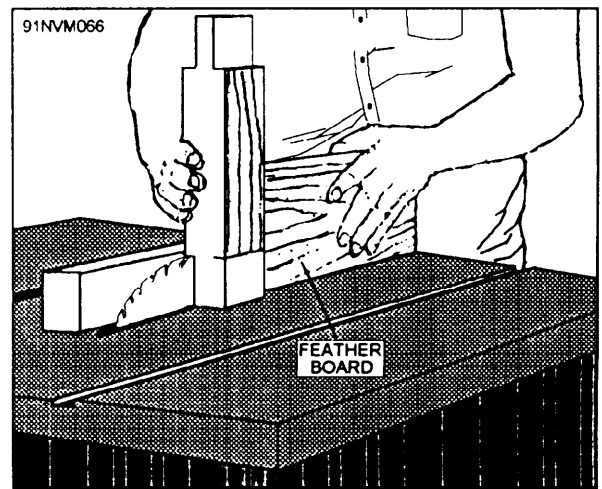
Using a feather board and push board to steady stock when cutting a tenon cheek.
